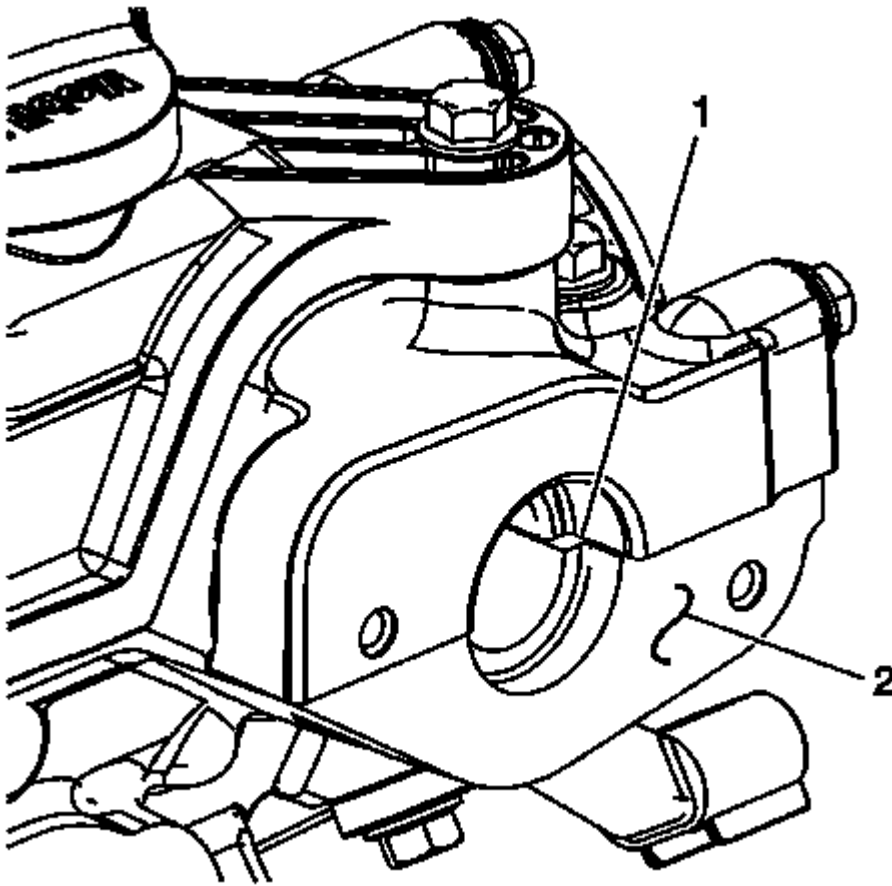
Identifying Fuel Pump Roller Lifter Orifice
